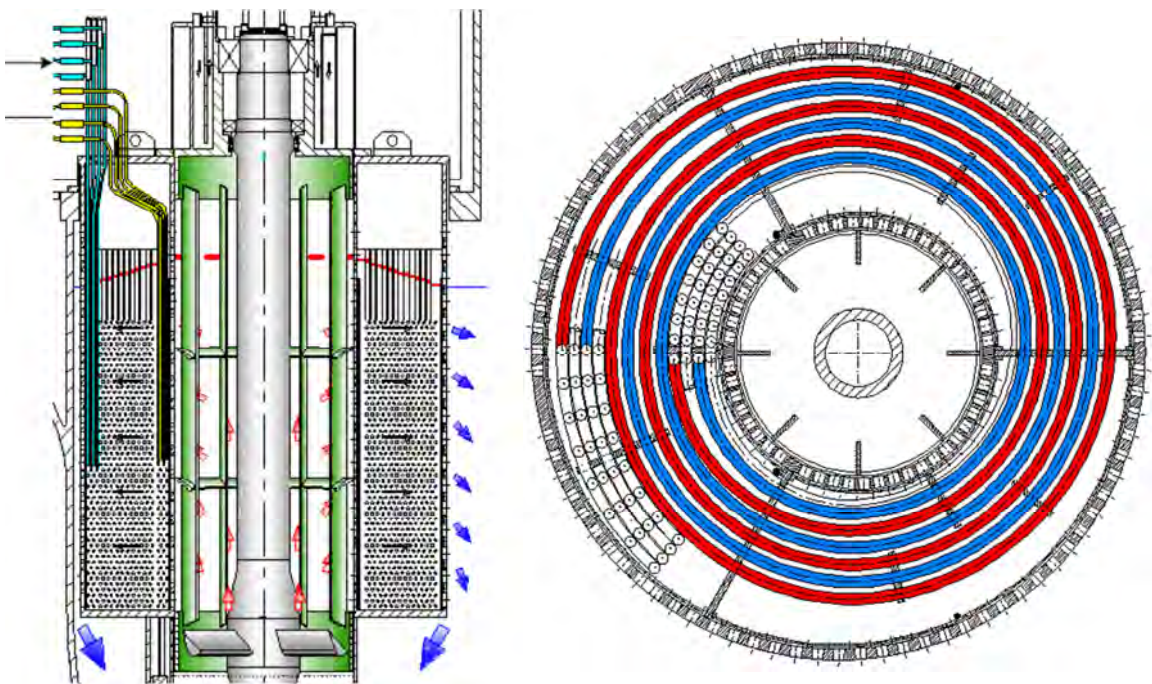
Steam generator and primary pump unit (left); spiral wound SG tube layer (right).
